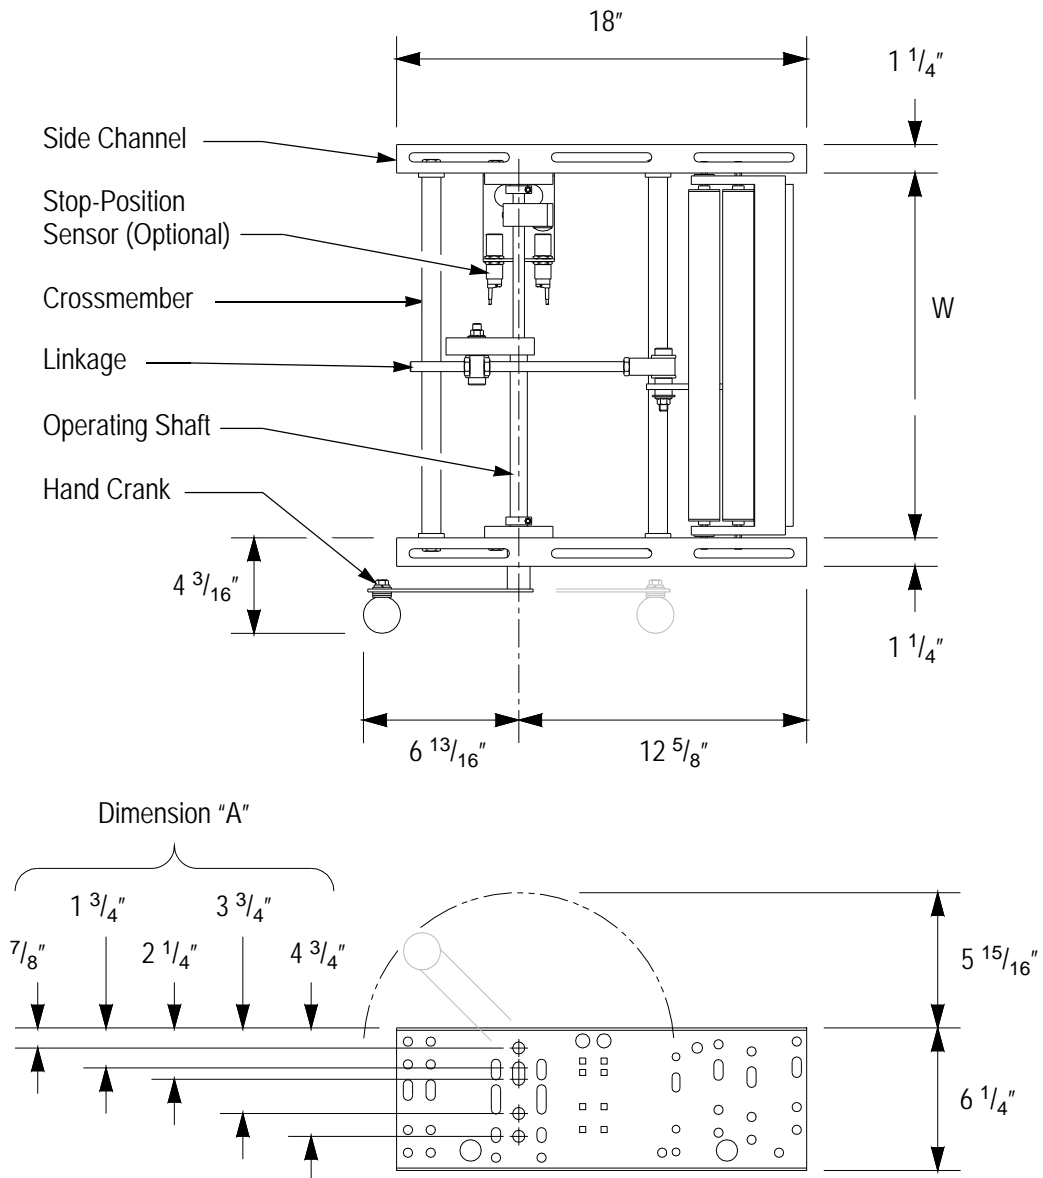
Mounting Frame – Hand-Operated Case Stop
